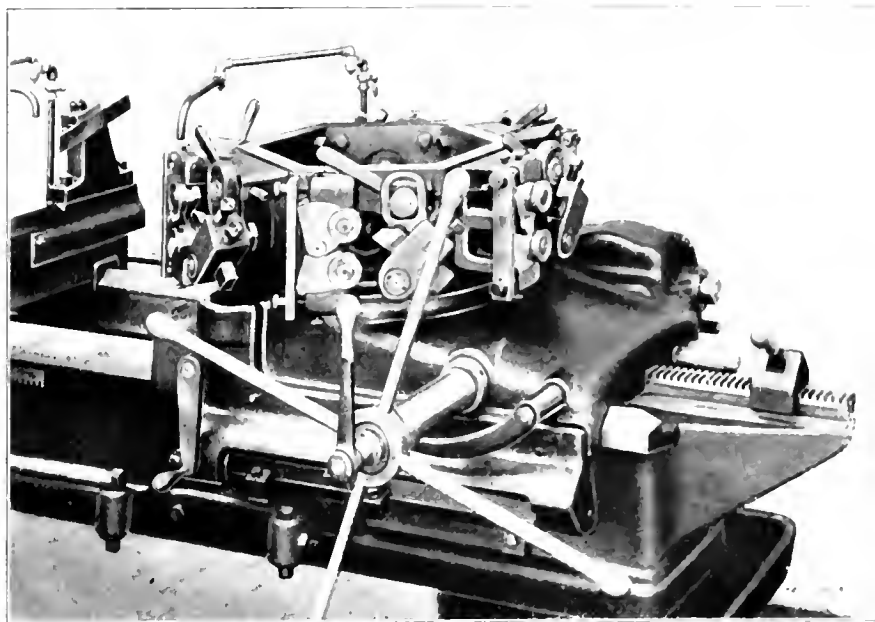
Showing Turret and Tools of Hollow Hexagon Lathe.
